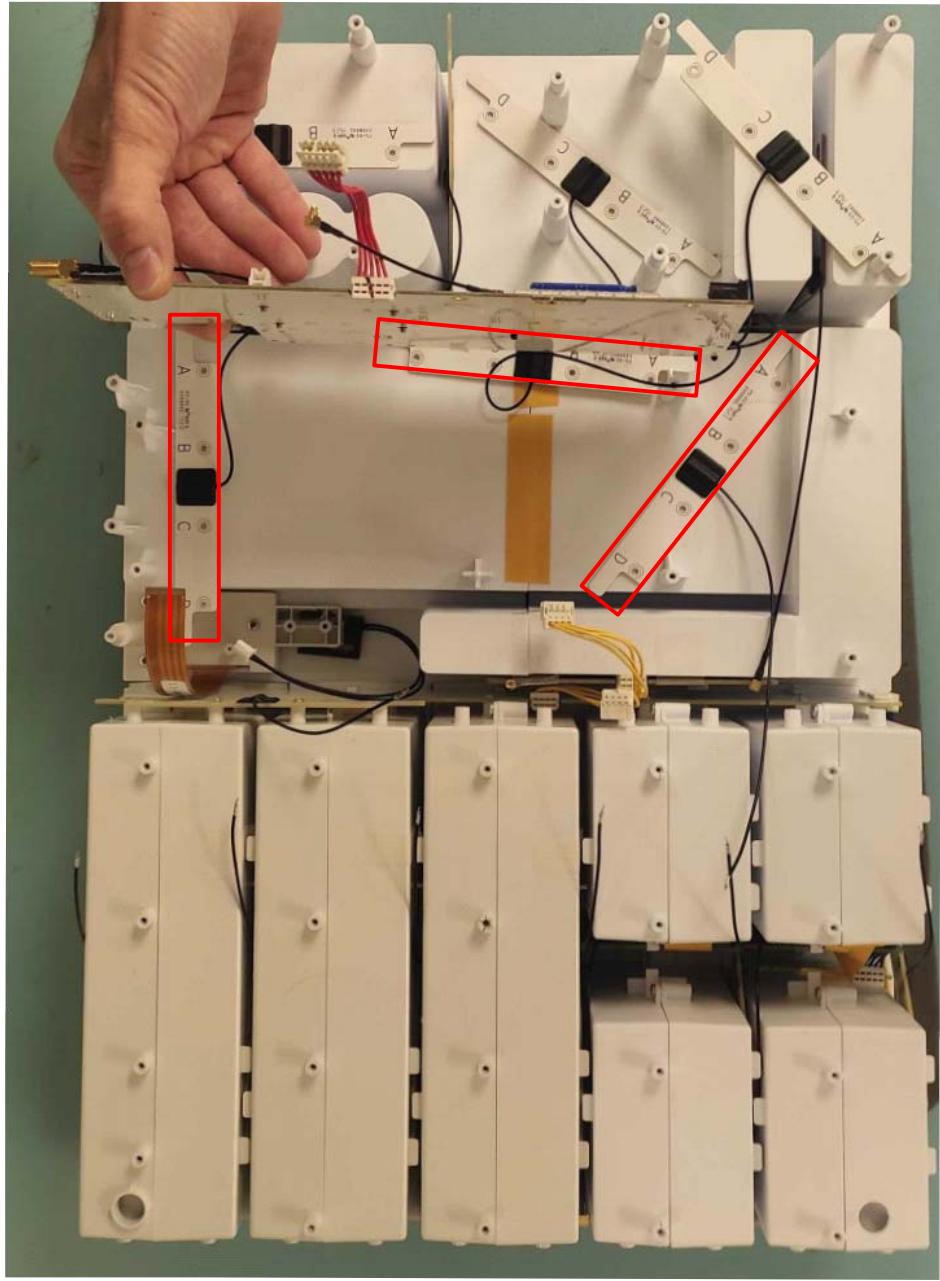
21000 Lifted to show 21173 PCB Dipole locations.
